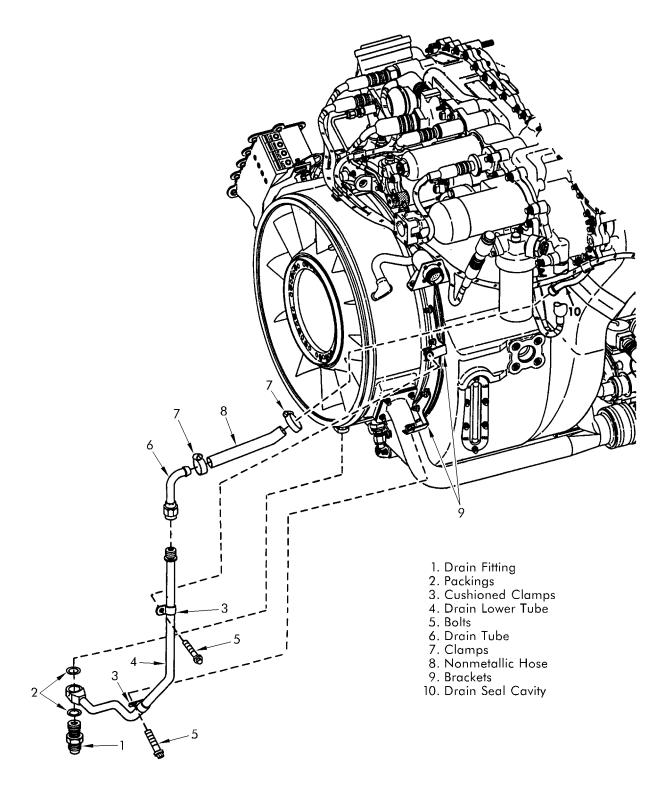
(T700, T701C, T701D) Axis-G Oil Drain Tubes; Removal and Installation
